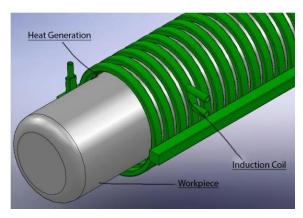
Heating inductor and workpiece (Isıtma indüktörü ve iş parçası)
